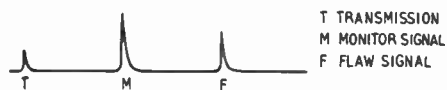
Display on cathode-ray tube when inspection fusion butt weld in steel plate.
